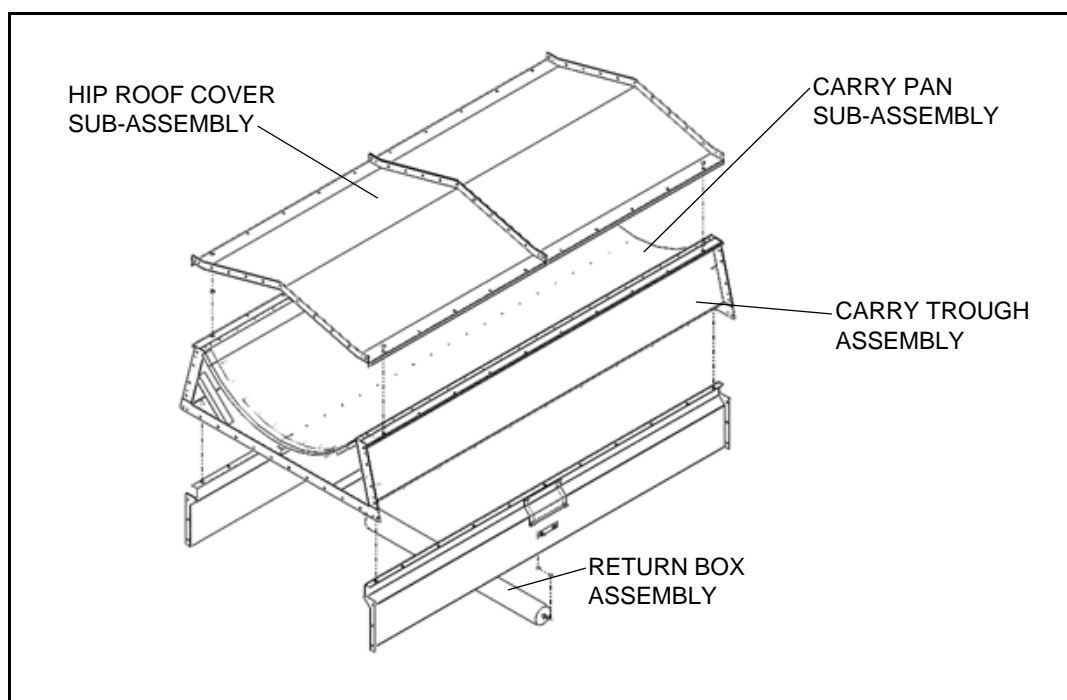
Exploded Isometric View of Intermediate Section w/ Roller Return
